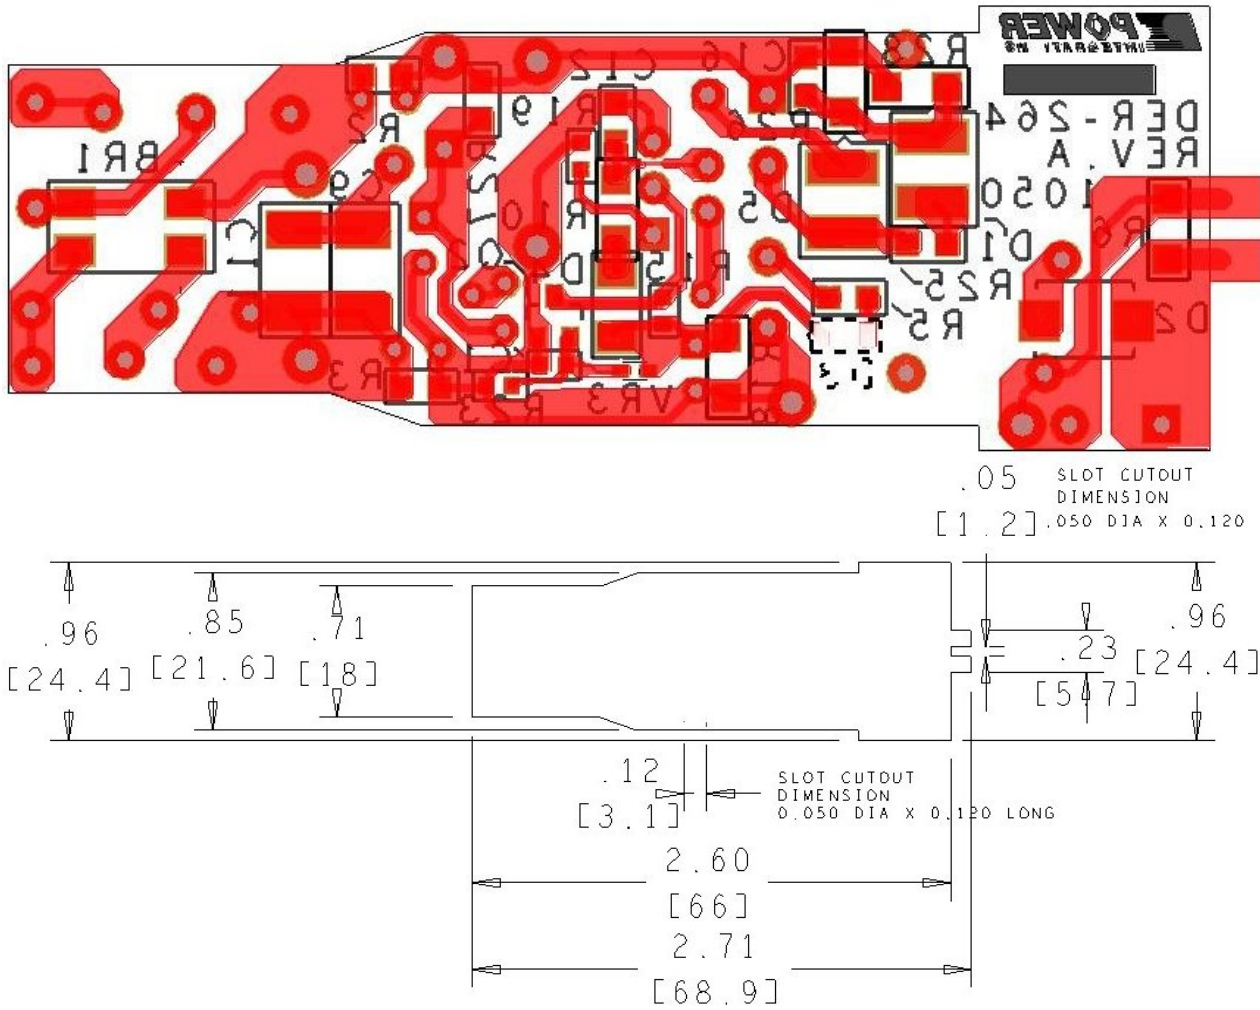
Printed Circuit Layout, Top, Bottom, and Outline.
